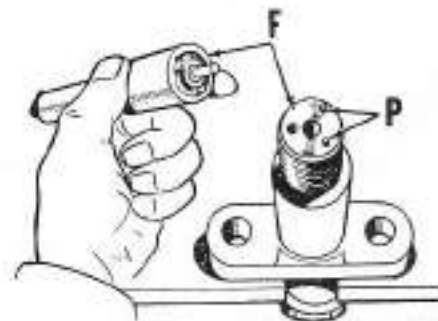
When reassembling nozzle and needle assembly in holder, be sure pressure faces (F) of nozzle and holder are clean and that dowel pins (P) on holder enter proper holes in nozzle.
